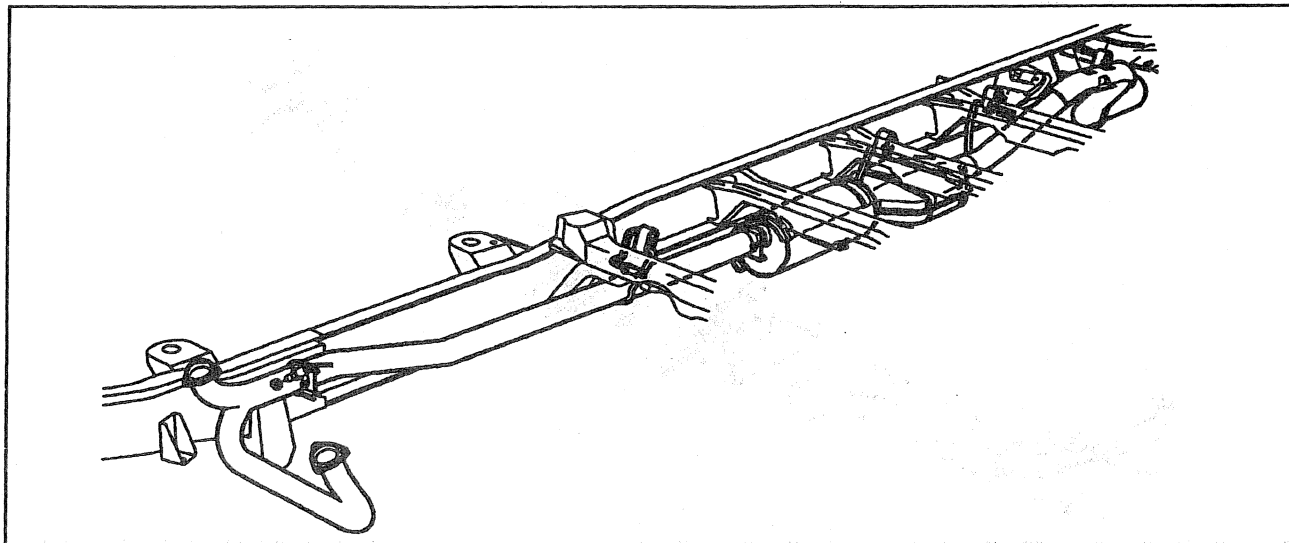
Exhaust System - C 3 Cab Chassis (3500 HD w/L19)
